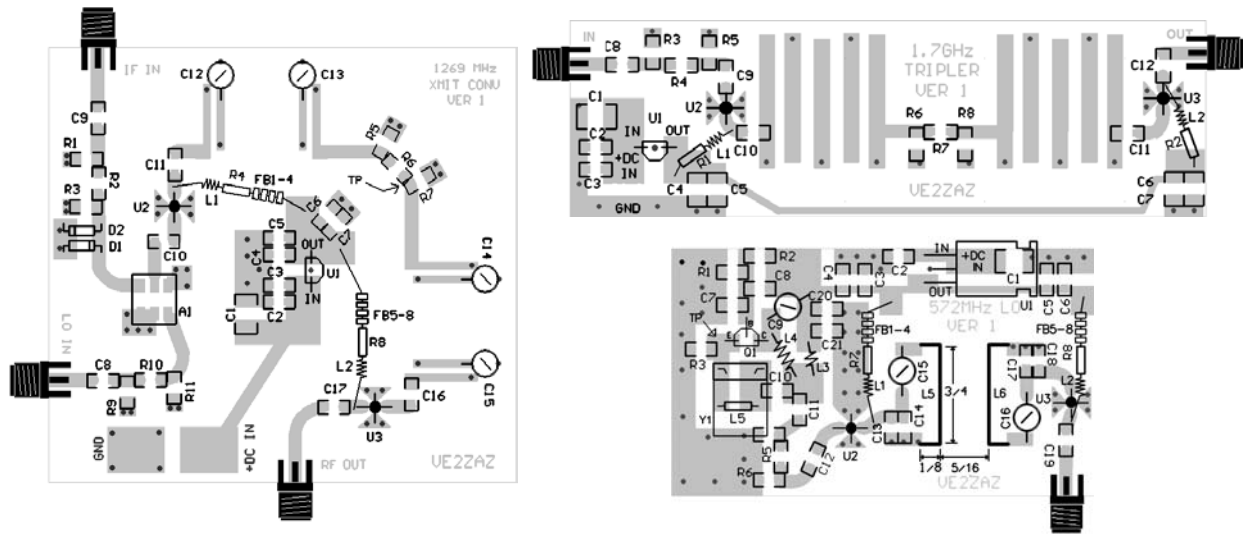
Layout for Mixer Board (left), LO Tripler Board (top-right) and LO Board (bottom-right). Boards
